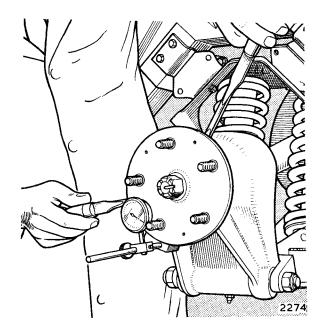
Checking the hub bearing end-float when in position (Churchill Tool No. J.13)
